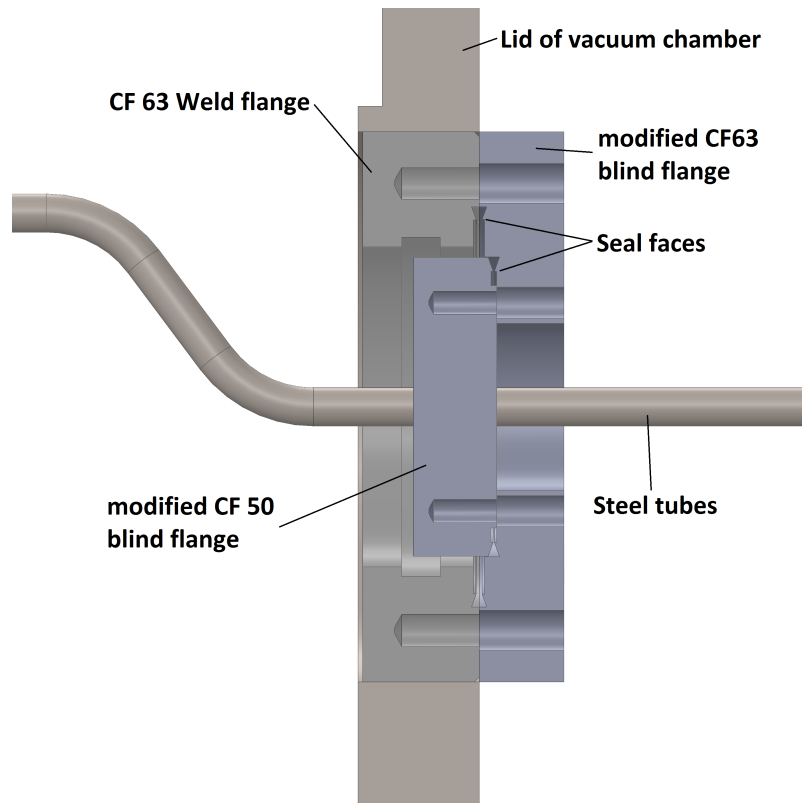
Side view cut through the vacuum-tight water feedthrough assembly showing bolted connections. Copper gaskets are not shown.
